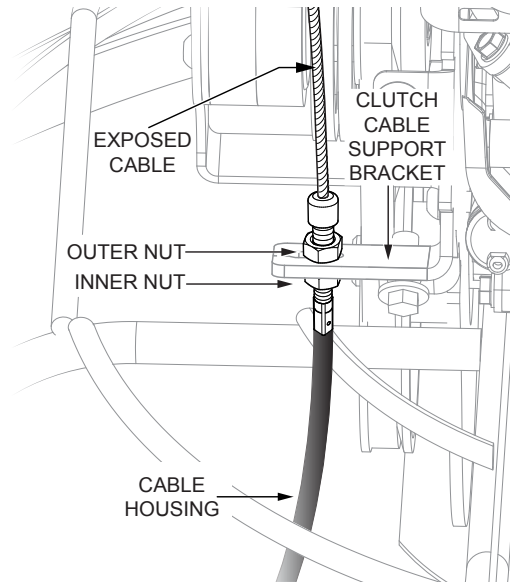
Inserting Clutch Cable Into Cable Support Bracket
